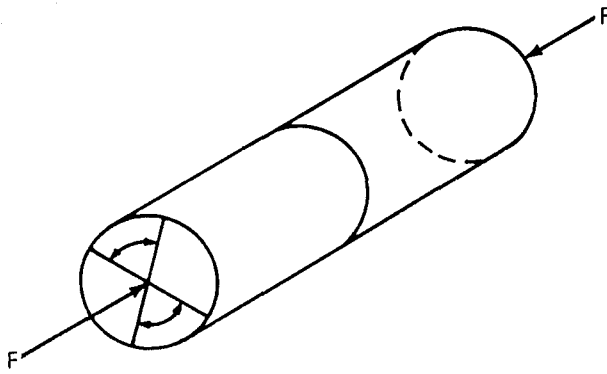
B—Angular Reciprocating Friction Welding
